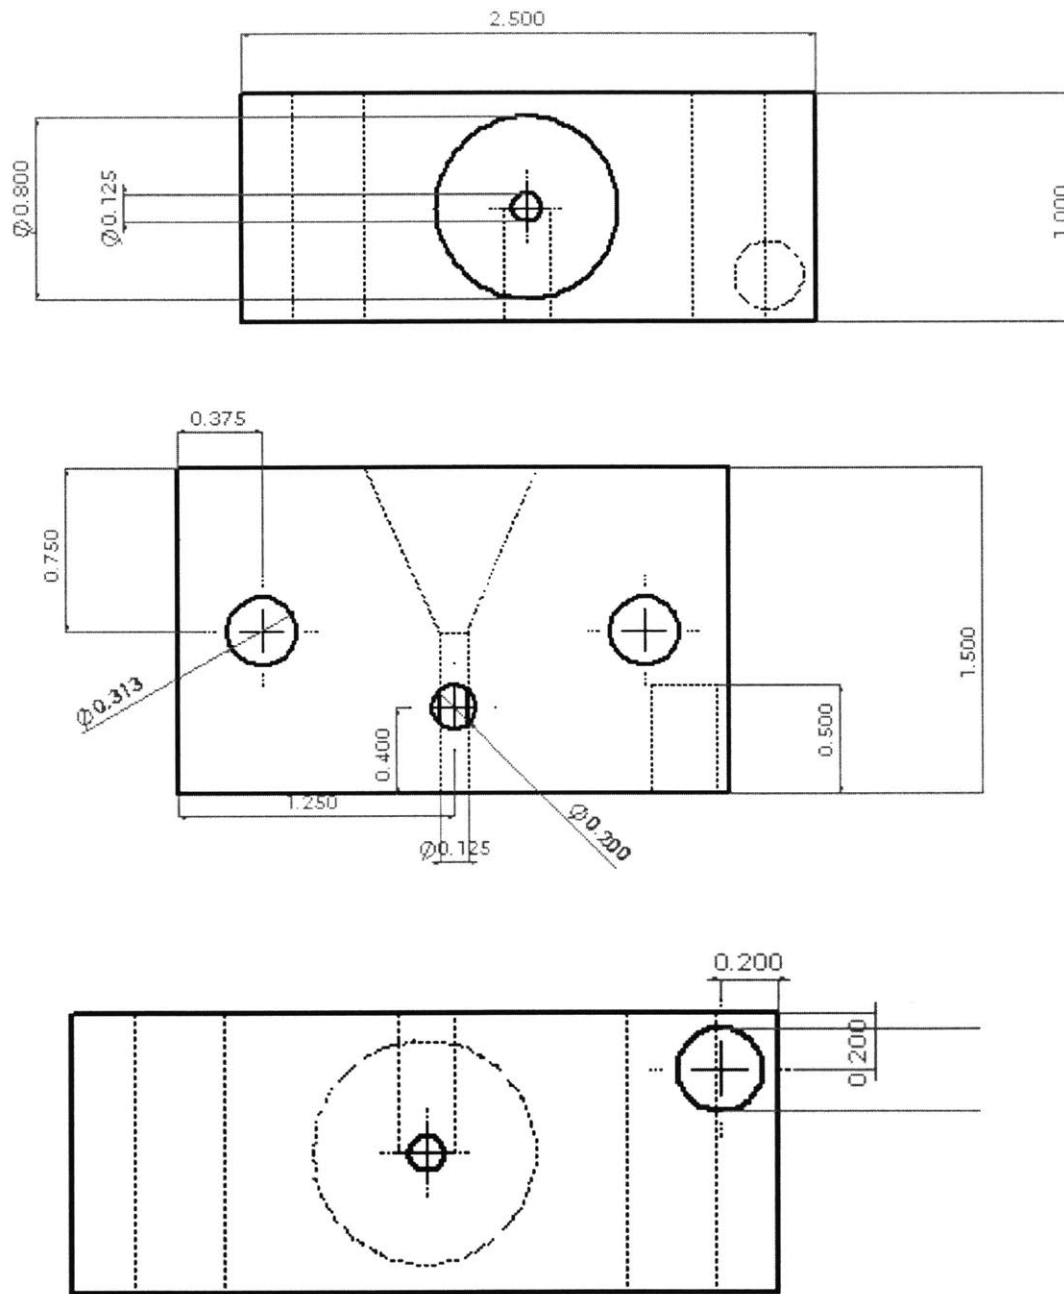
engineering drawing views of the modified conical shaped support (dimensions are in inches)
